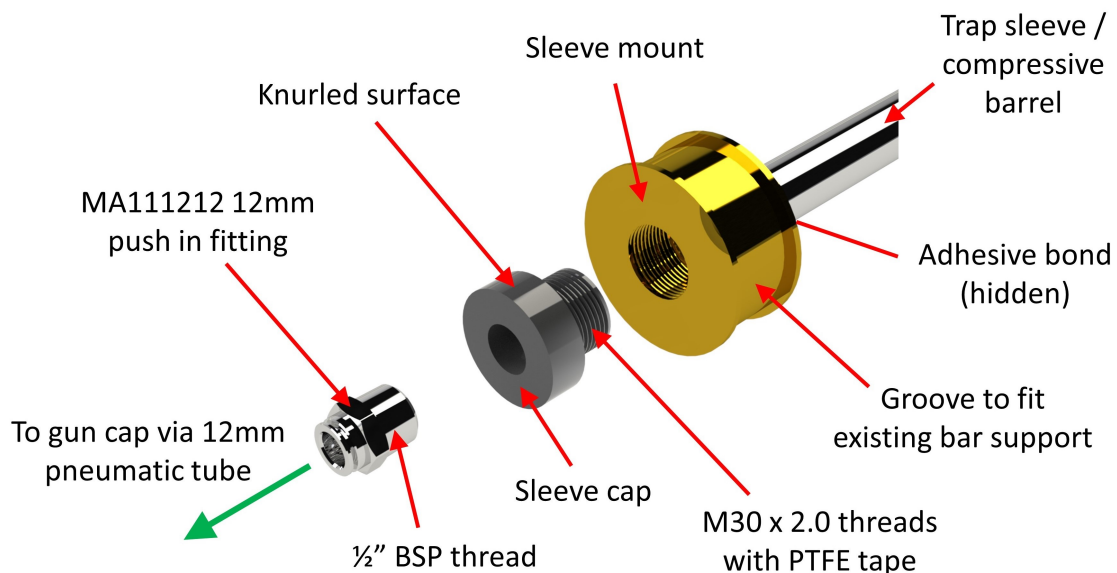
Isometric exploded view of the isolator and compressive barrel hardware
